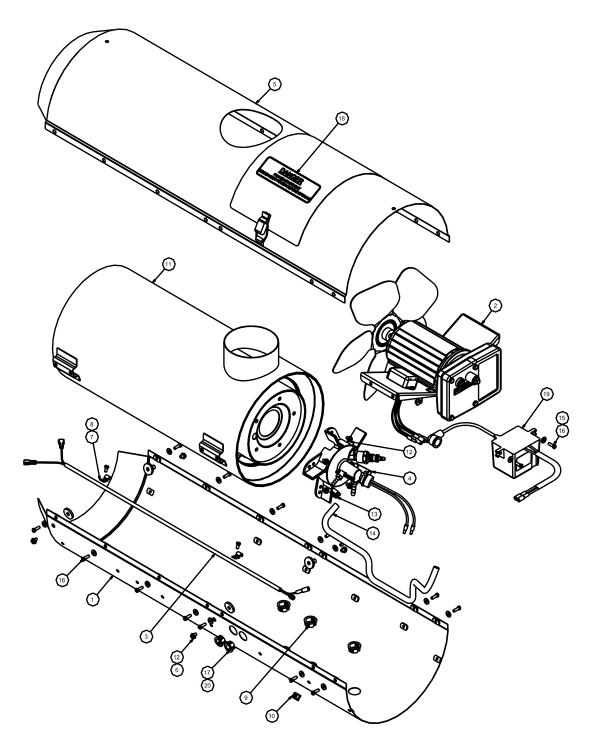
COMBUSTION CHAMBER ASSEMBLY
